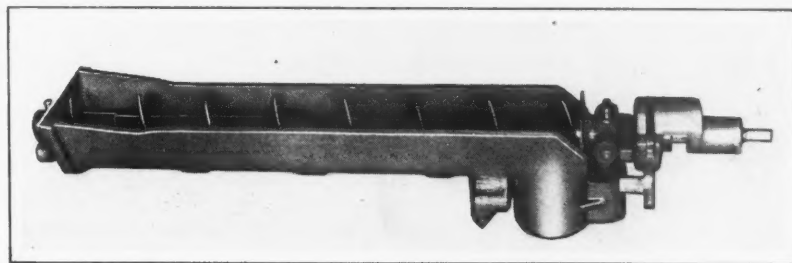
Conveyor for Carrying away the Chips without Attention on the Part of the Operator
